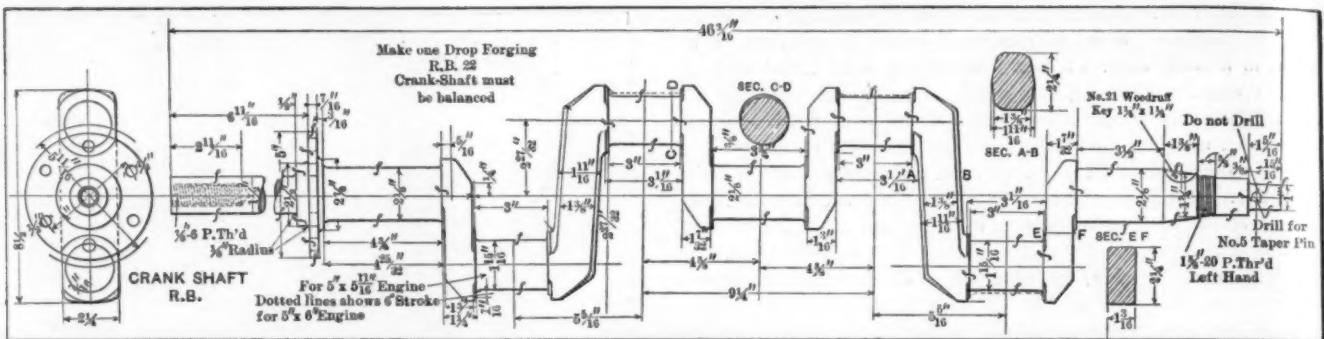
Crankshaft, with flange for flywheel, substantial cheeks, liberal bearings and good material
